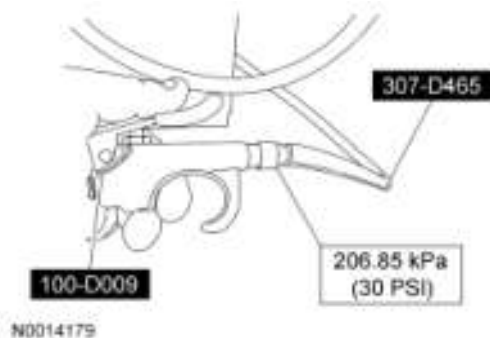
Identifying Special Tools (100-D009) And (307-D465)
